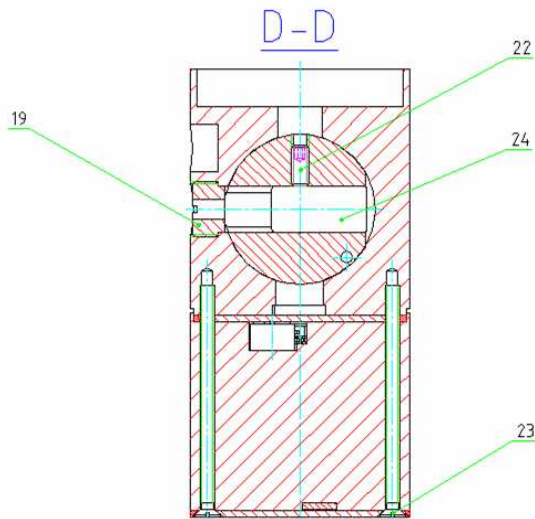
Scheme mutual location of fuse mechanical elements in perpendicular plate to view A-A from Fig.1; 19-screw plug, 22-set screw, 24-primer, 23-screw
